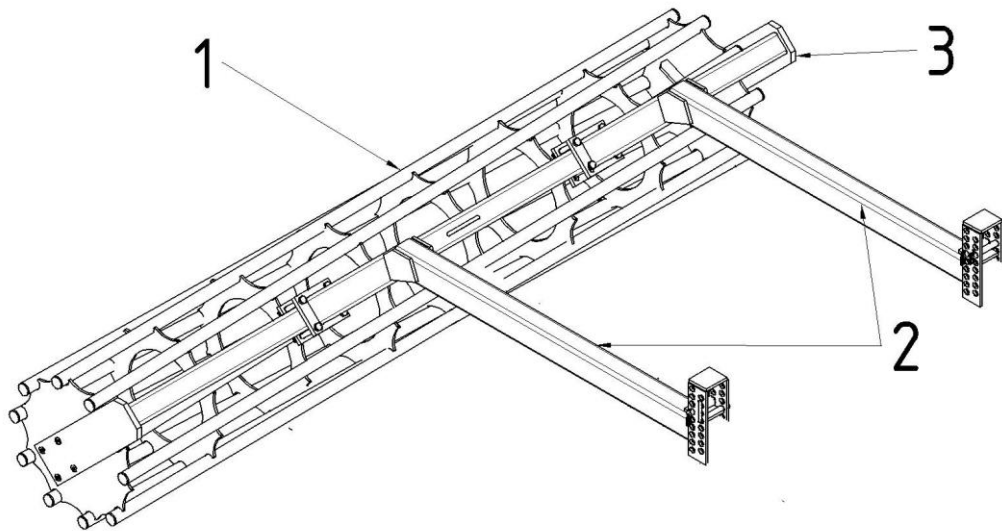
Connection of arms with the shaft clamp: 1 – tubular shaft; 2 – arms; 3 – shaft clamp.
